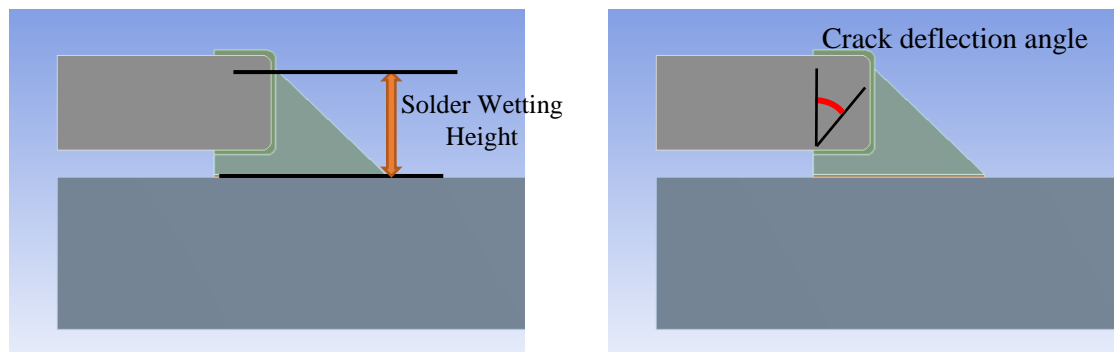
Definition of Solder Wetting Height and Crack Deflection Angle.
